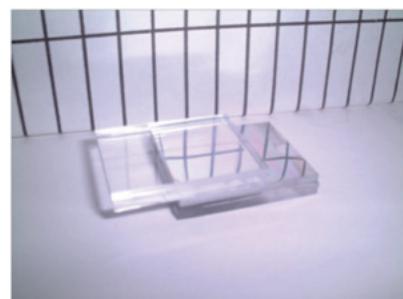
Example of laser welding of Aluminum and PMMA
